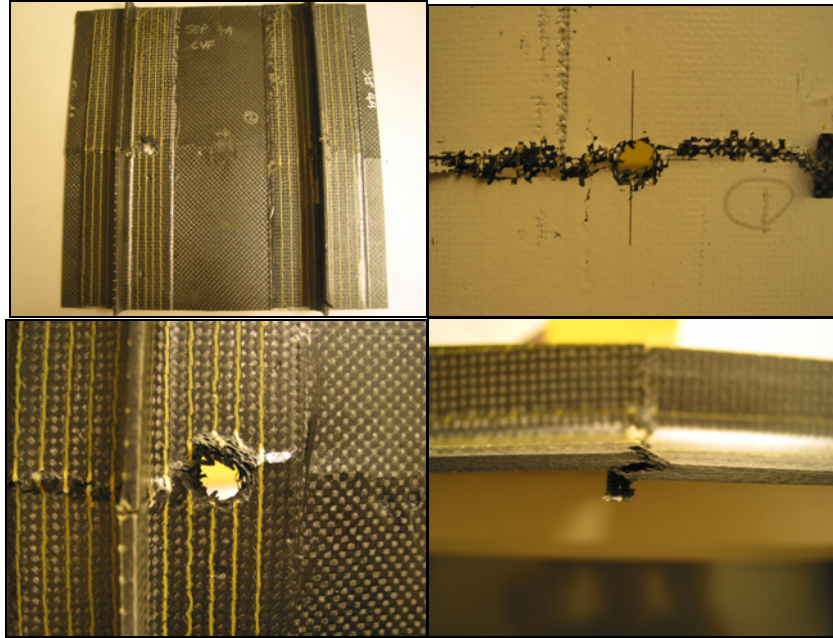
FAILED SPECIMEN (SEP4a): FLANGE-IMPACTED, SELECTIVELY STITCHED
